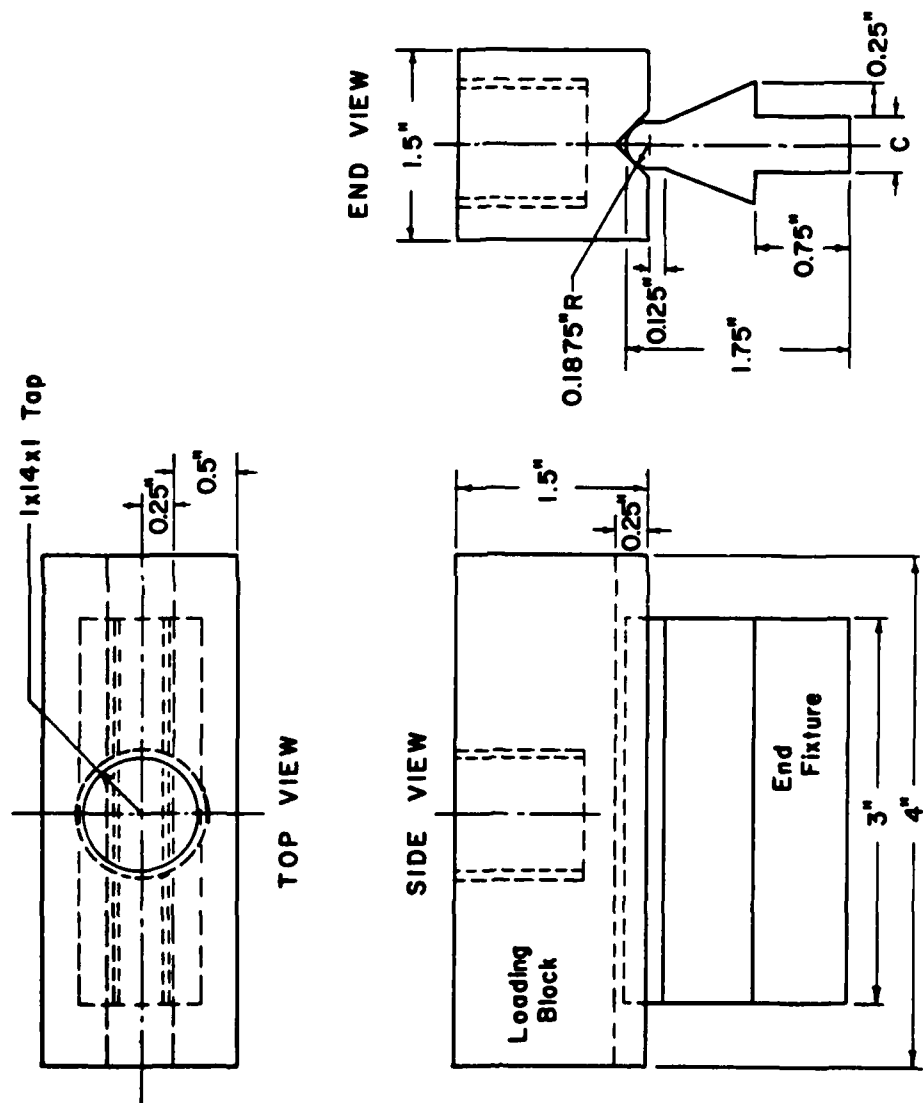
MECHANICAL DRAWING OF SIMPLE-SUPPORT END FIXTURES
